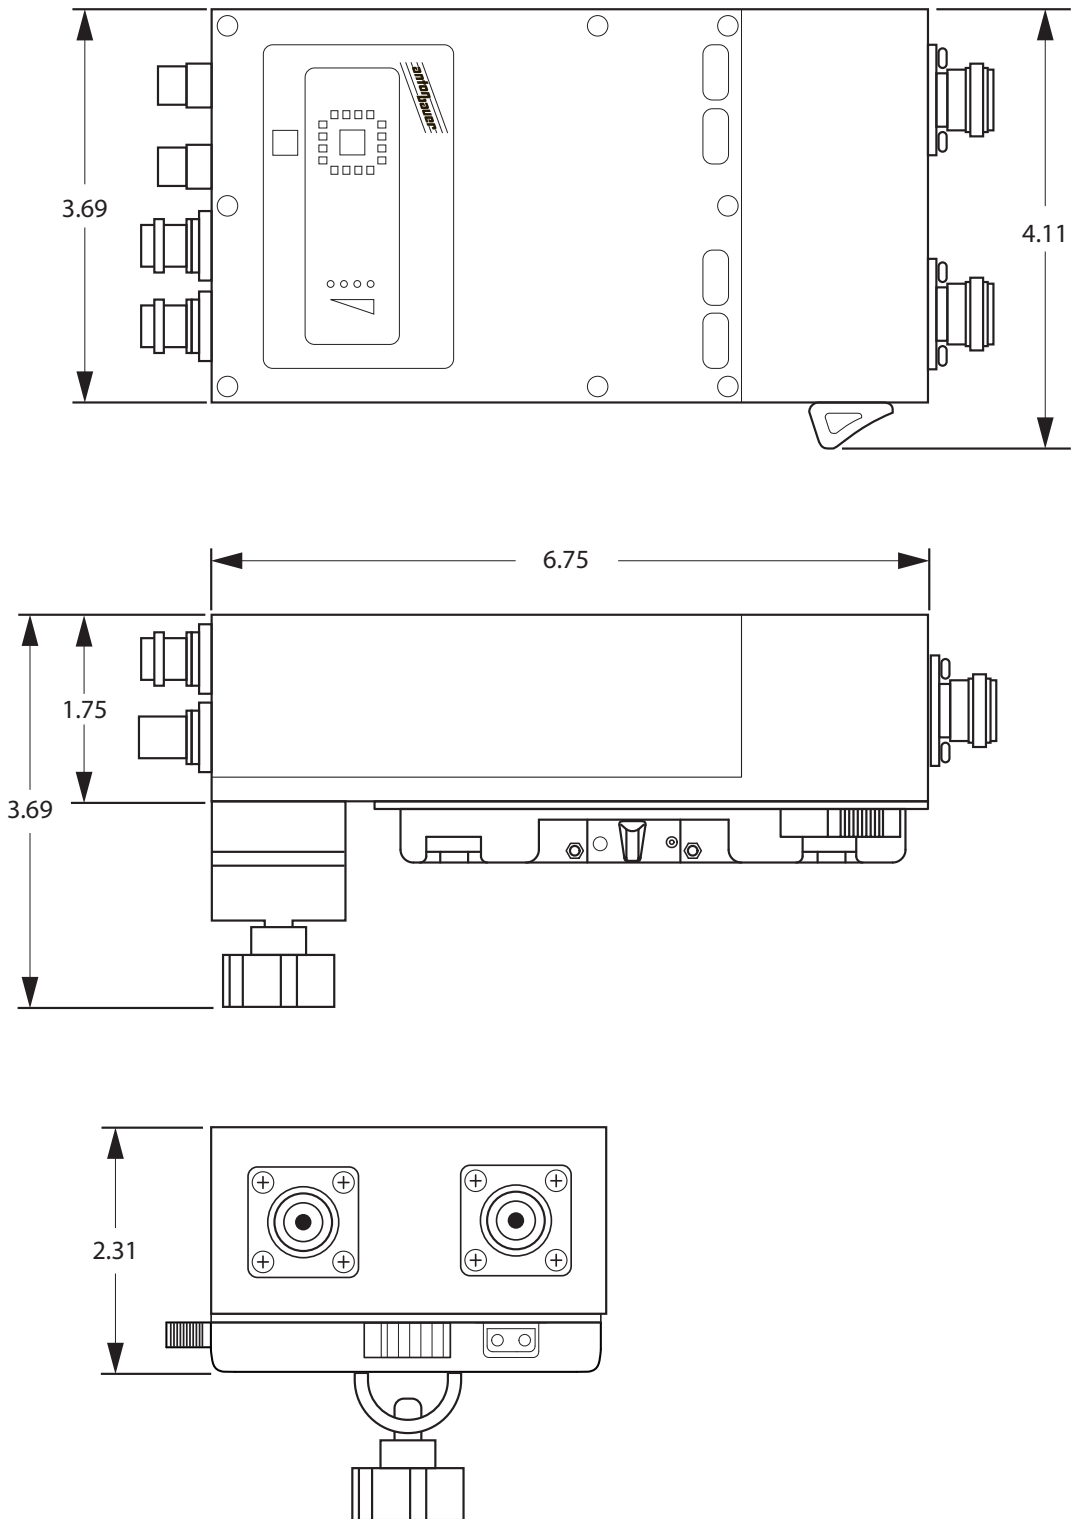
AB-HDRX Outline Drawings (Dimensions in Inches)
